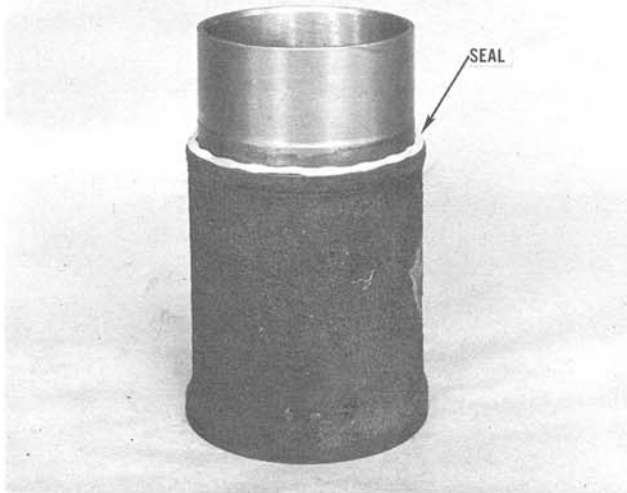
CYLINDER SLEEVE SEAL INSTALLATION
